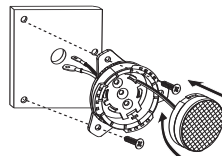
A through 7D. The Starfish™ tweeter mount is intended to be used when the tweeter will be installed behind a factory grille (e.g., replacing the factory tweeter behind a door panel). The Starfish will allow you to mount the component tweeter directly to the panel itself or to the area behind the panel. The six mounting tabs can be removed easily to create a number of custom configurations.
